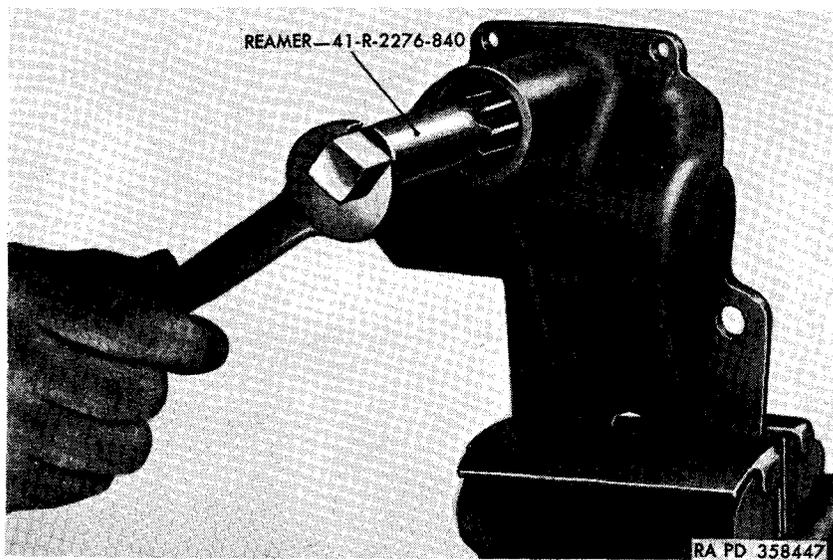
Reaming Steering gear housing bearing with reamer 41-R-2276-840.
